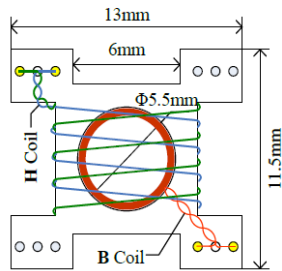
Improved structure of H coils and B coils [2.40]
